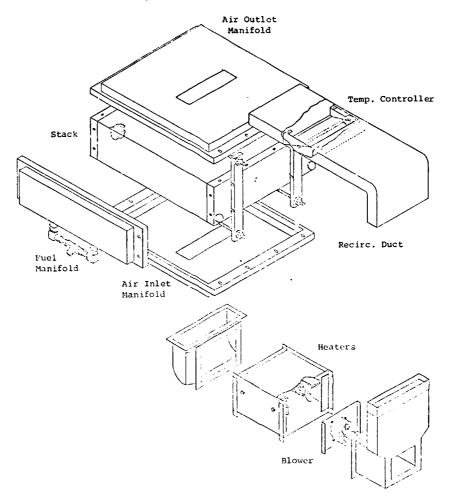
EIGHTY-COLL STACK ASSEMBLY
